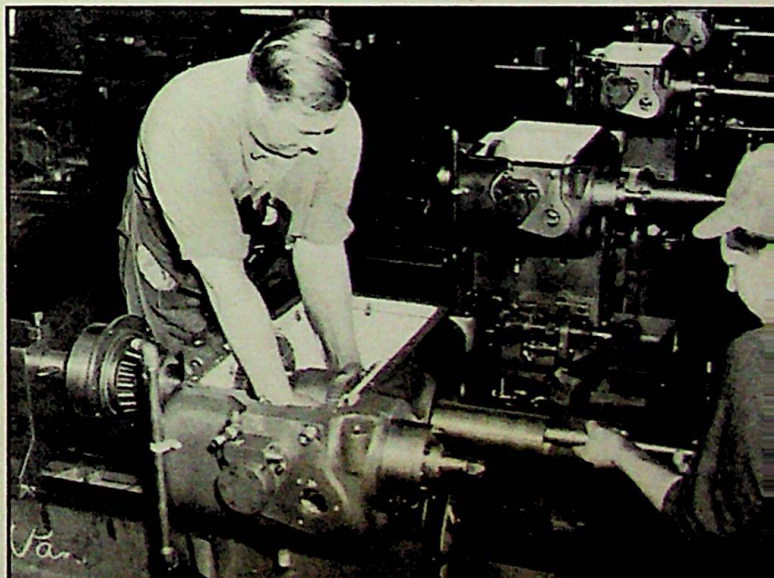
Installing the spindle and gears in a No. 5 Turret Lathe Head
